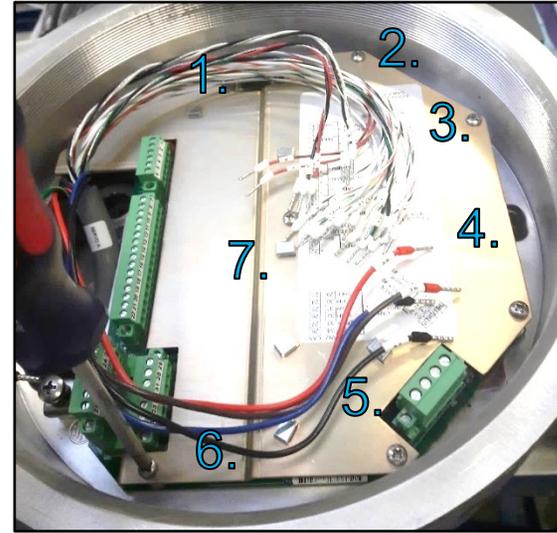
PCB Cover Holding Screws Placement Inside VariStroke
